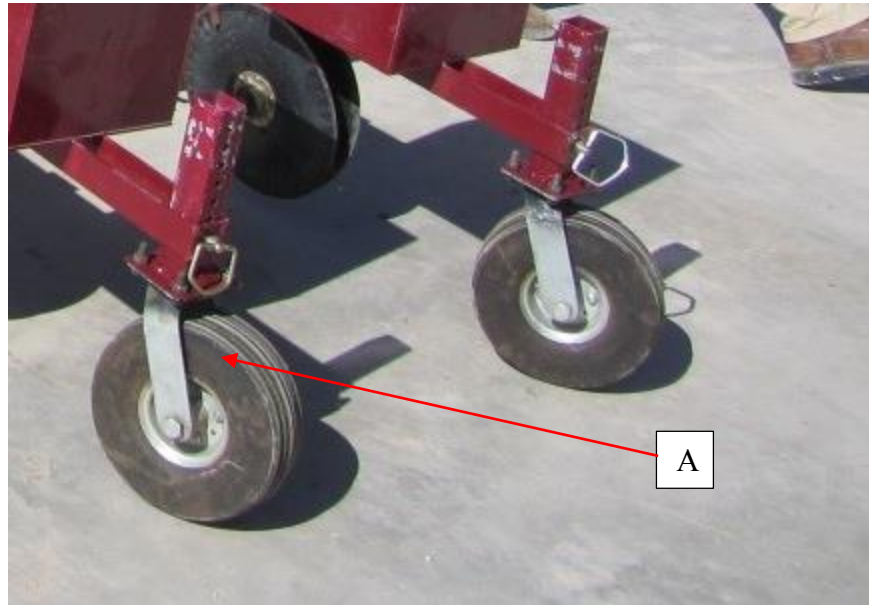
Final Press Wheel Configuration. A) New press wheel assembly
